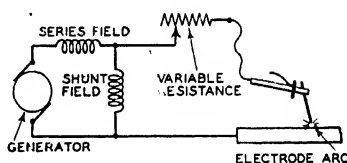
SIMPLE DIAGRAM OF D.C. WELDING CIRCUIT
